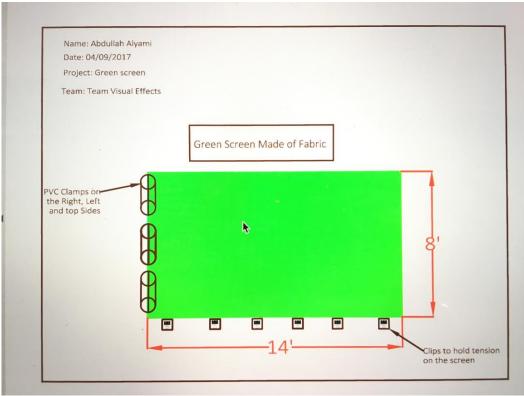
Drawing of fabric and clamp system. Drawing by Abdullah Alyami
